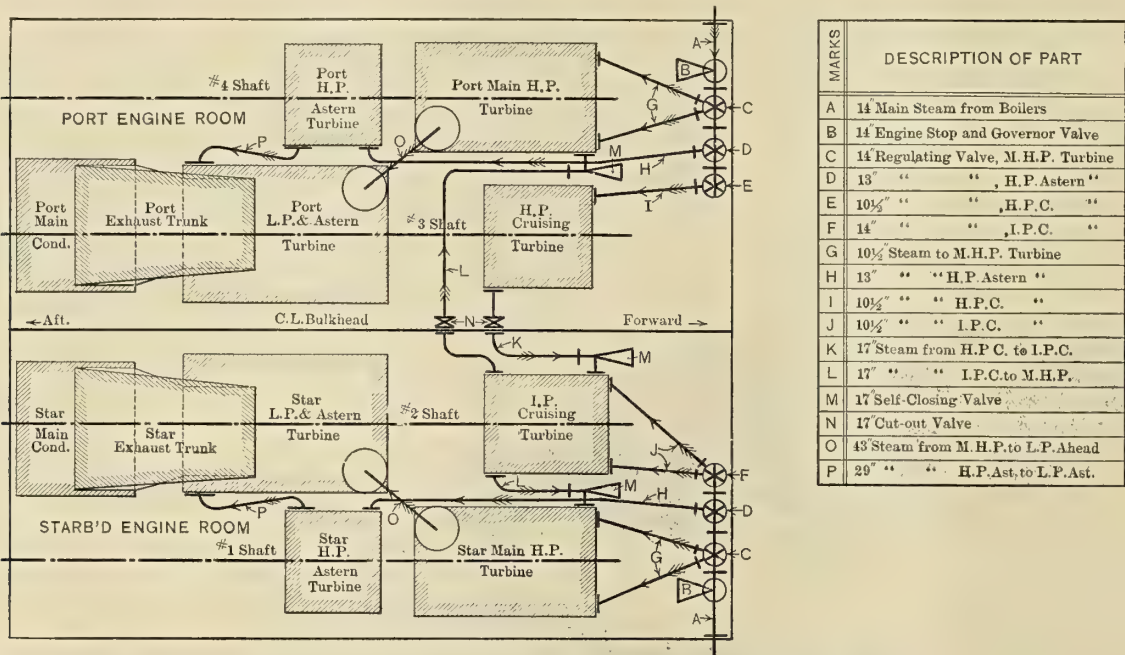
SKETCH SHOWING ARRANGEMENT OF MAIN ENGINES AND PIPING
